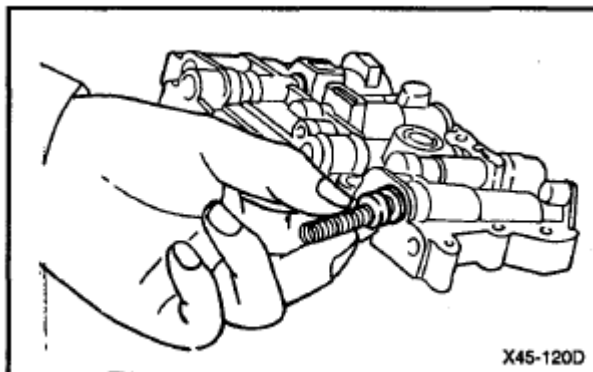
Removing/Installing 1-2 Shift Spring & 1-2 Shift Valve
